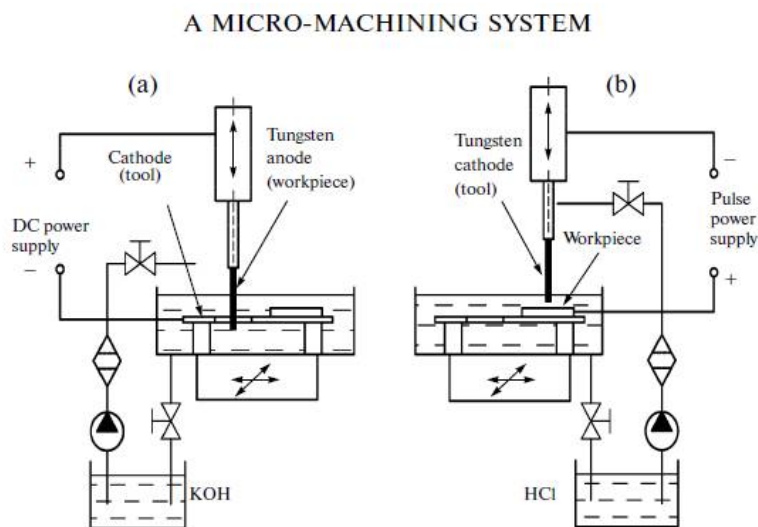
Schematic diagram of μECM sequentially: (a) micro-tool machining, (b) micro-workpiece machining (Zhang et al., 2011)
